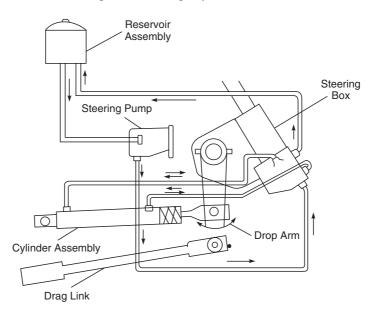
Power Steering Layout-hippo and Beaver Dumper
